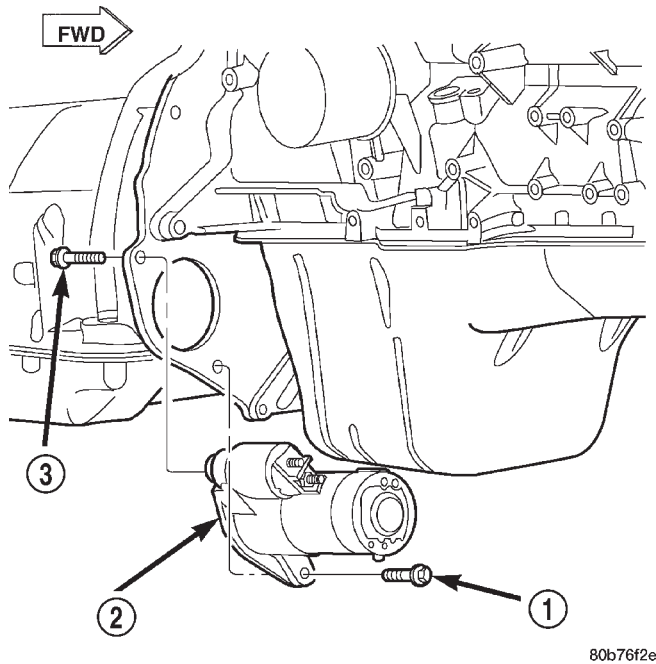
Starter Motor Remove/Install - 4.0L Engine
